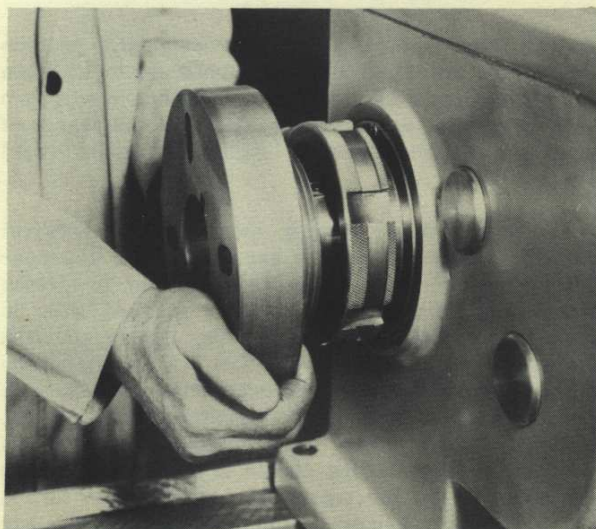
Mounting Face Plates or Chucks on LO Spindle
